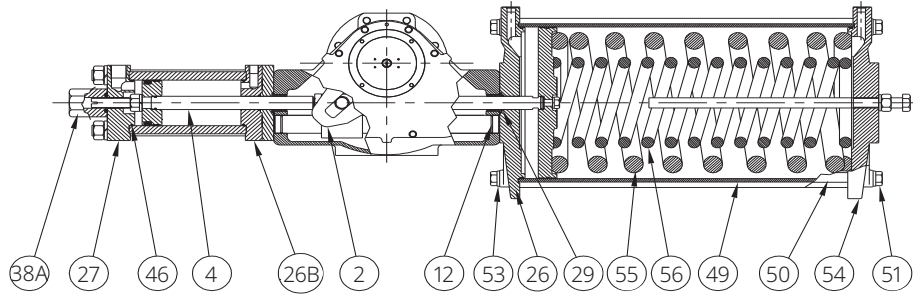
Single-Acting Spring-Return Two Pistons - Model HP80 Series
